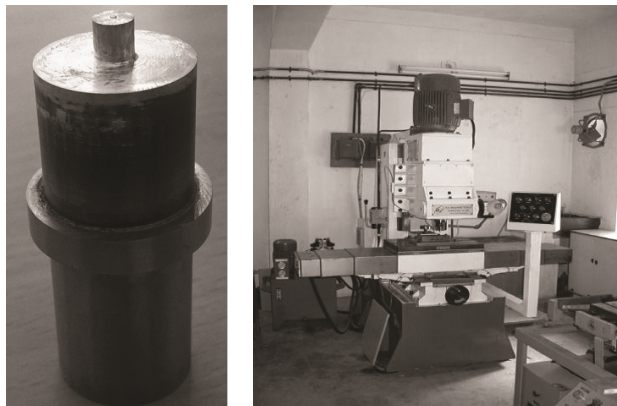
(a) Cylindrical tool, (b) Friction Stir welding machine
